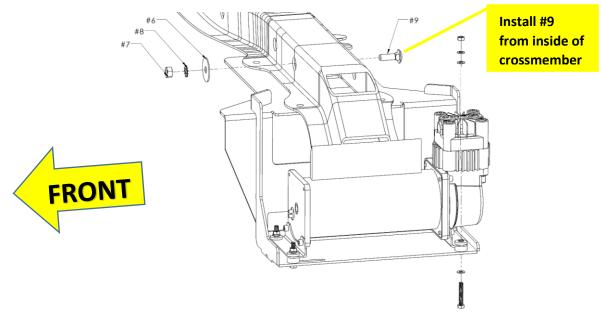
TUNDRA-101 with Air Compressor and Hardware; Exploded View (6450RC Shown)
